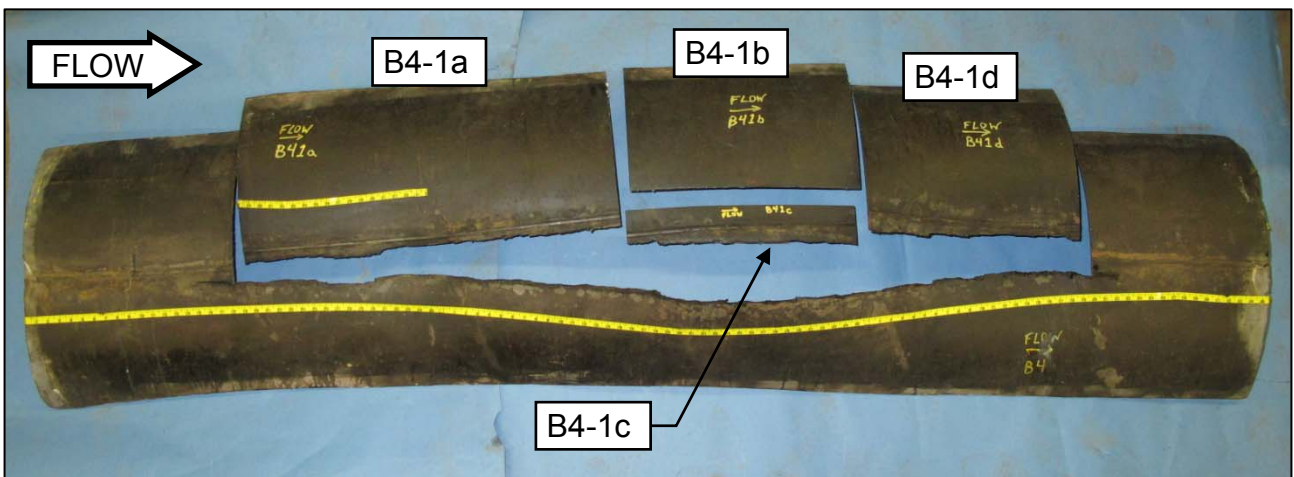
Piece B4 after sectioning for closer examination of the fracture surface on piece B4-1c.
